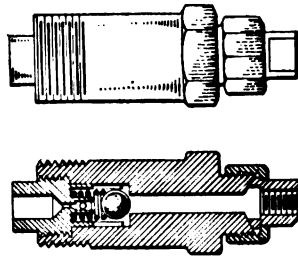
Little giant engine nozzle. (Chicago Pneumatic Tool Co.)
